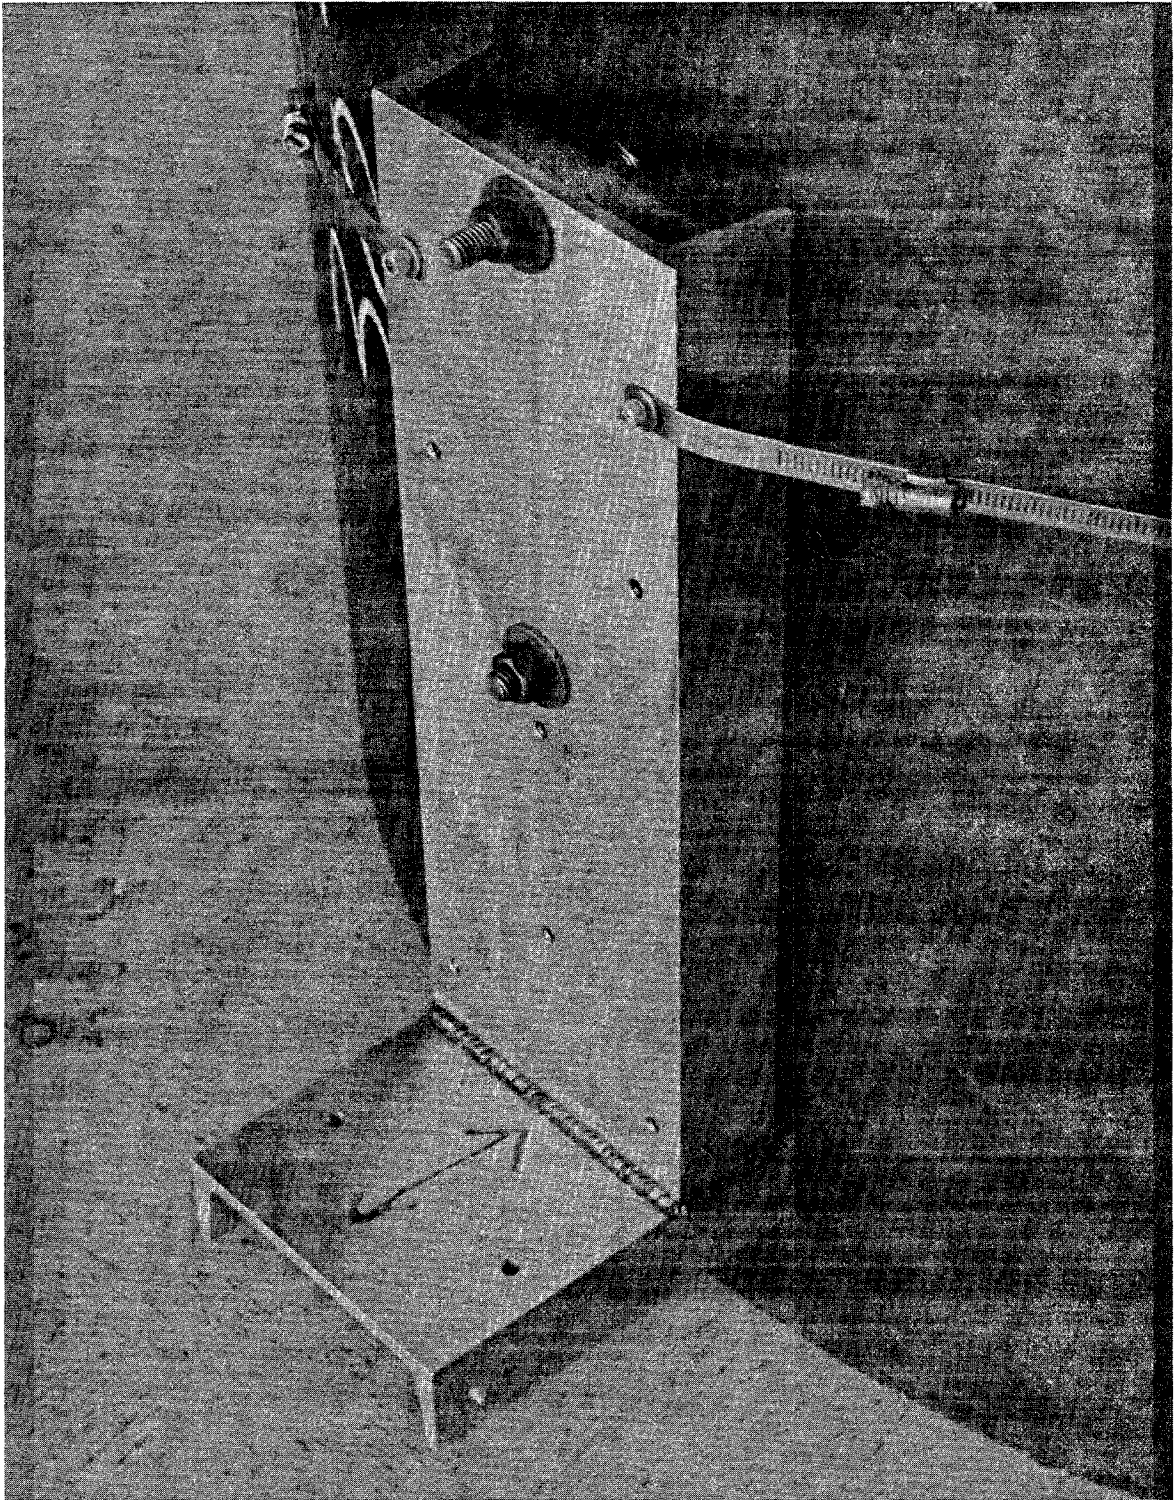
Mounting Fixture Attached to Simulated Leg of Platform
